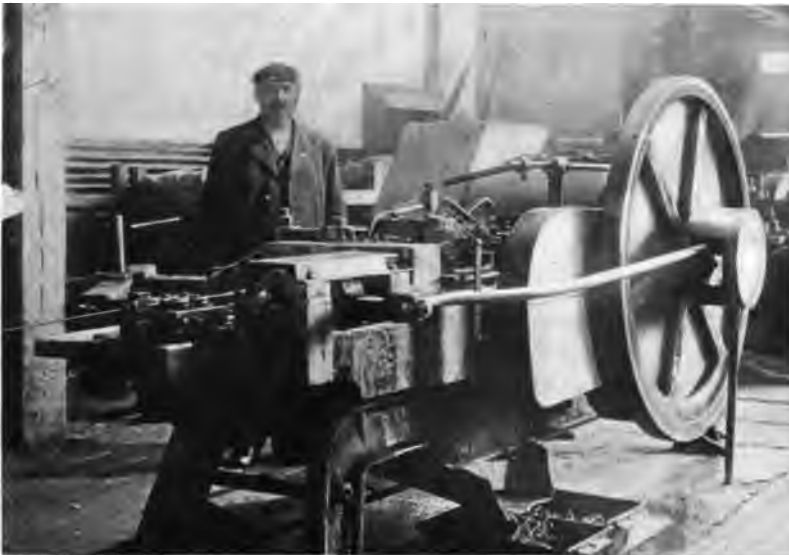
Guards for Belt, Fly-wheel, Crank Adjusting-Block, Crosshead, and Gearing of Nail Machine.
